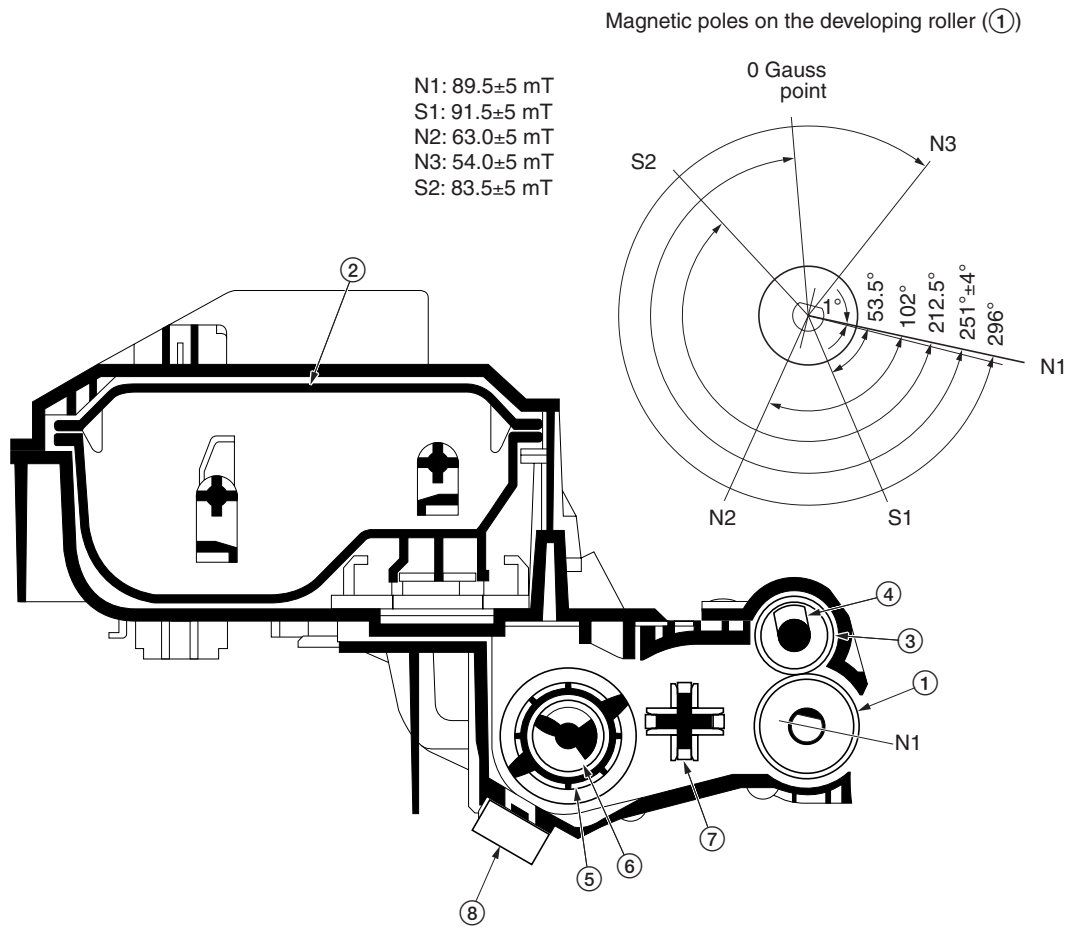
Magenta developer and magnetic poles on the developing roller
